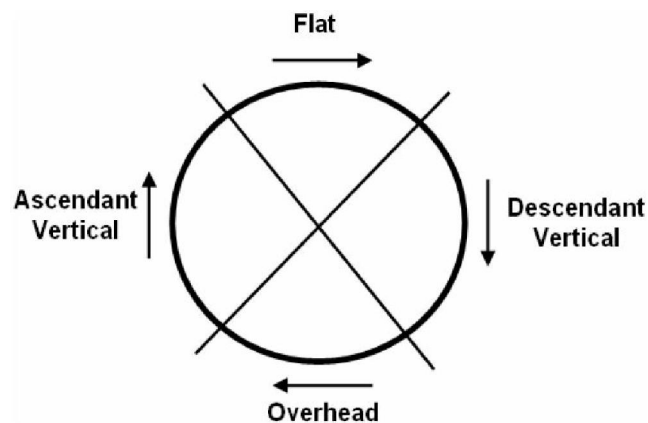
The four welding positions in the orbital pipe welding [207, 208]
